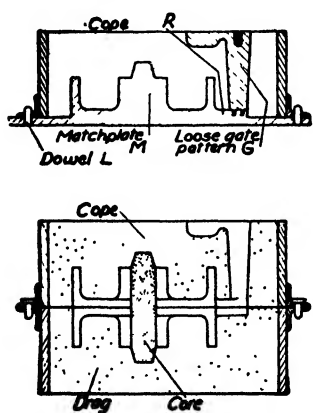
Molding a Pulley with a Cored Hole, Using a Matchplate and a Loose Pattern.
